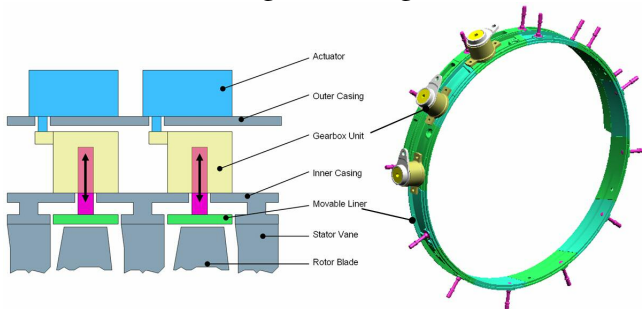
Schematic of hydraulically actuated mechanical ACC with adjustable liner segments.
